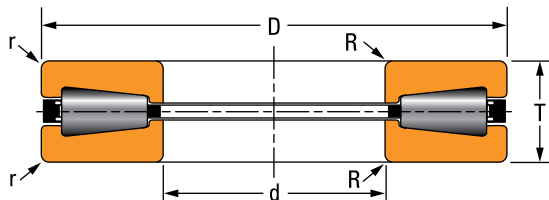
Type TTHD thrust tapered roller bearing assembly.
